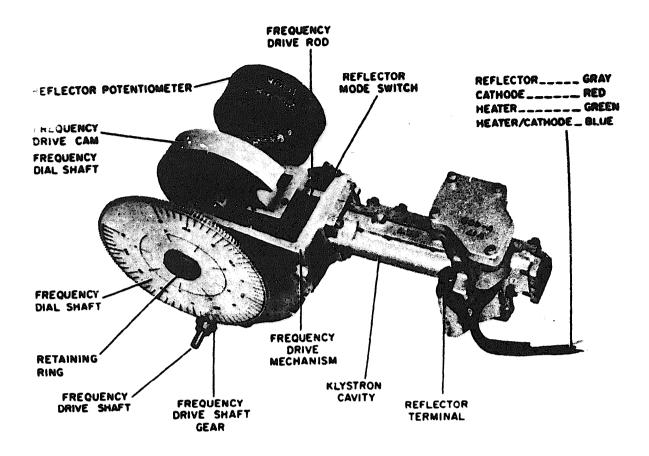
View of Klystron Cavity and Frequency Drive Mechanism
